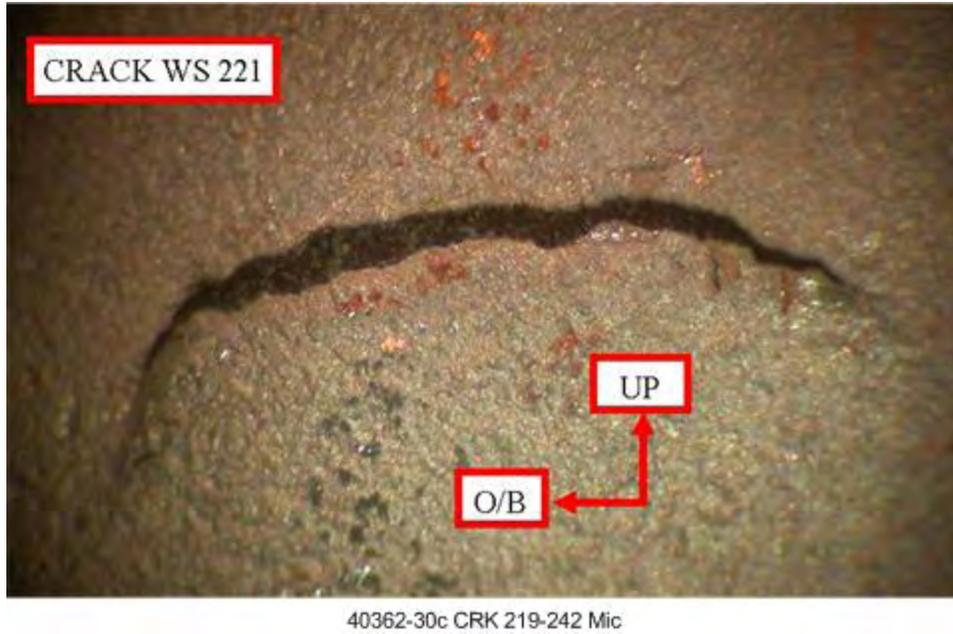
Microscopic View of Crack on the Left Wing Rear Spar WS 221
